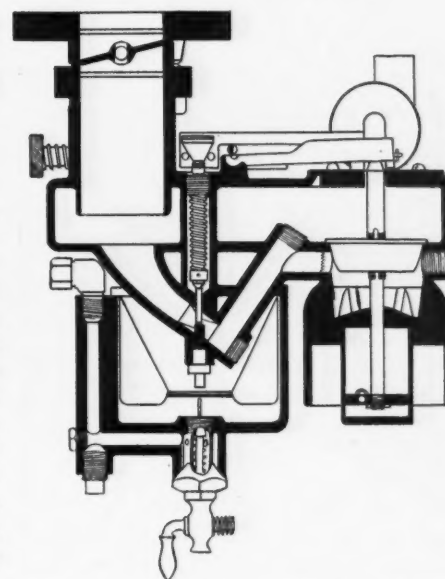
CROSS-SECTION DIAGRAM OF THE MOTSINGER CARBURETER
